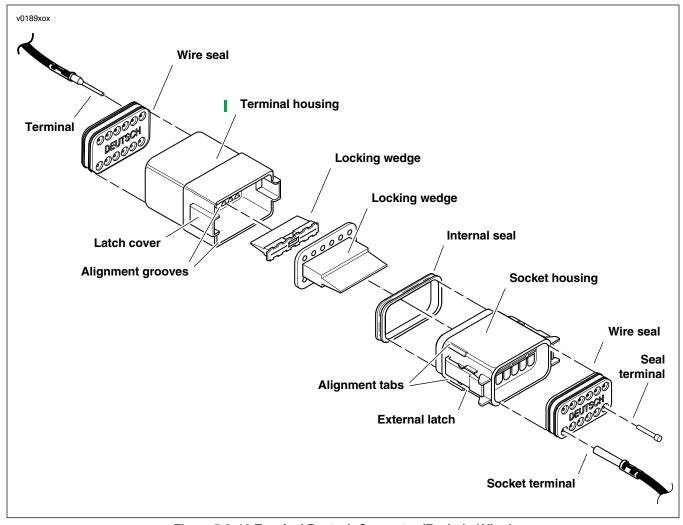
12-Terminal Deutsch Connector (Exploded View)
